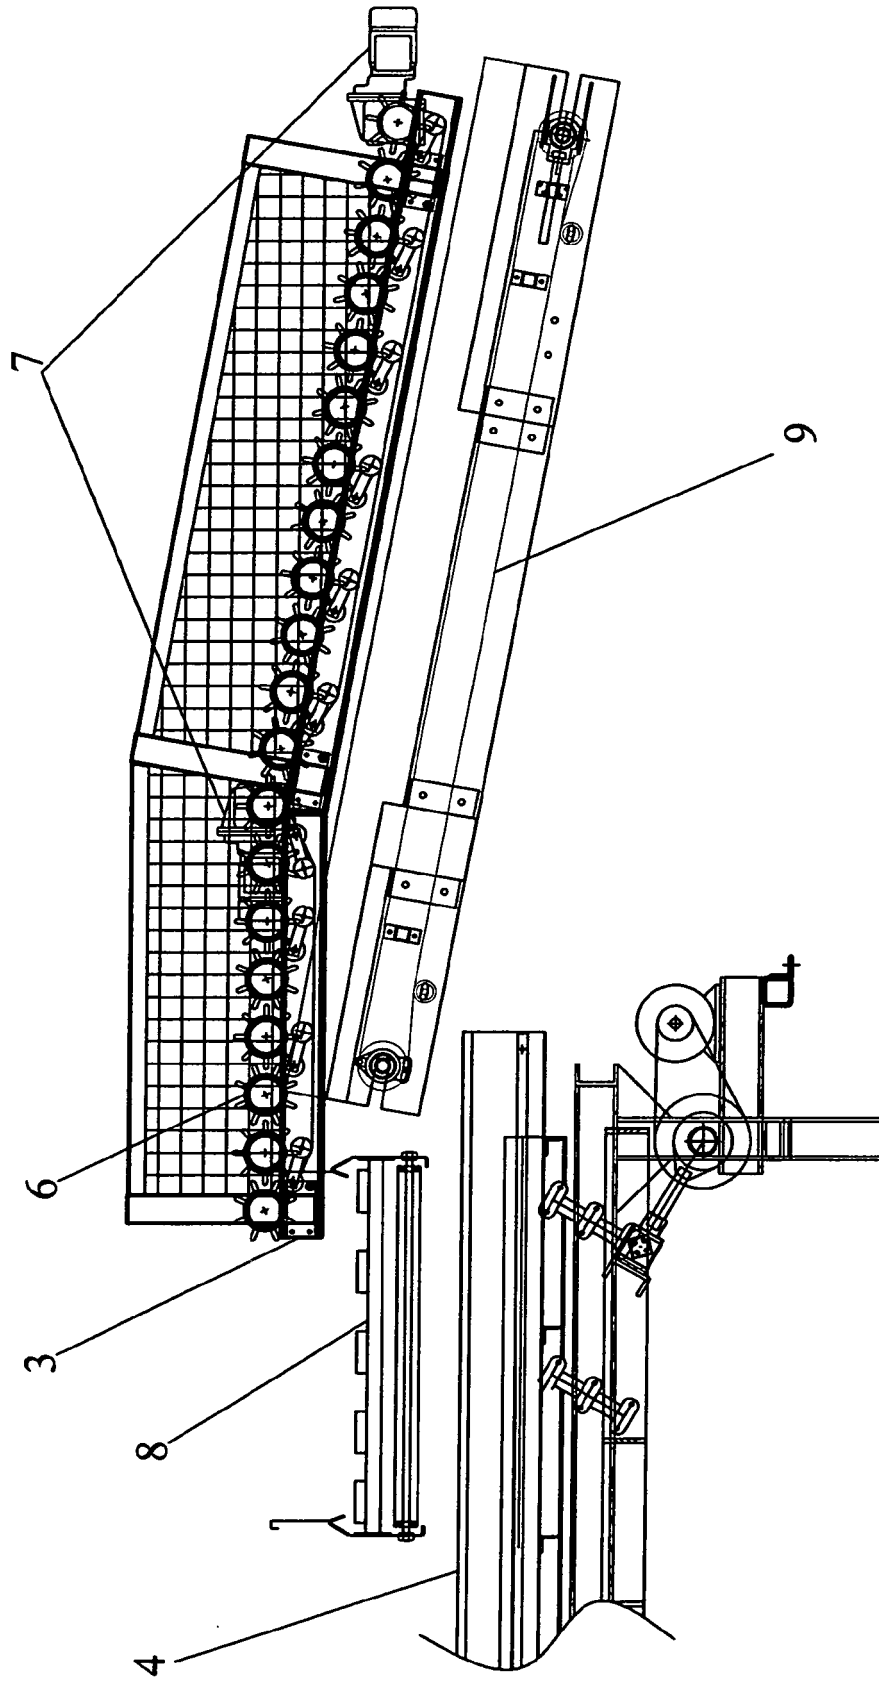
presents a side view of the rollers (3) and the cleaning process while the tobacco leaves pass above the roller row with pins (6) that get moved by electric motors (7) via belt gearing and the big clean tobacco leaves are propelled in a conveyor belt (8). In the same time the scrap and foreign materials that pass through the gap between the rollers (6) are propelled by another conveyor belt (9) into the vibration sieve (4) for an accurate cleaning. The size of the gap between the rollers can be altered according to the size of the tobacco leaves and to the desirable separation level.
